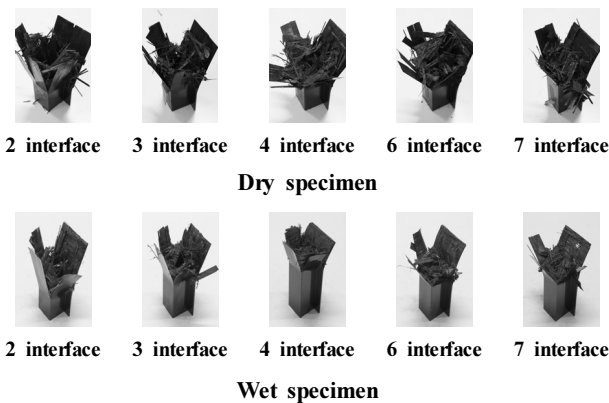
Collapsed shape of CFRP hat-shaped sectional members (outer 0°)
